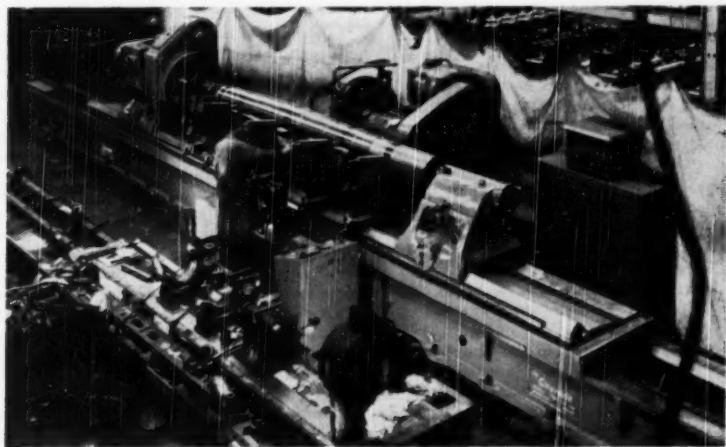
VIEW OF 40-TON PLAIN-GRINDING MACHINE GRINDING A 4-TON SHAFT
